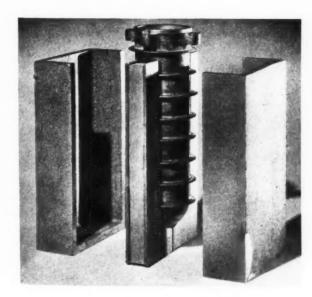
First Step in Making Chuck Jaws is to Provide a Wooden Form to Hold Part in Place while Pouring Low-temperature Alloy around it into Metal Holders
